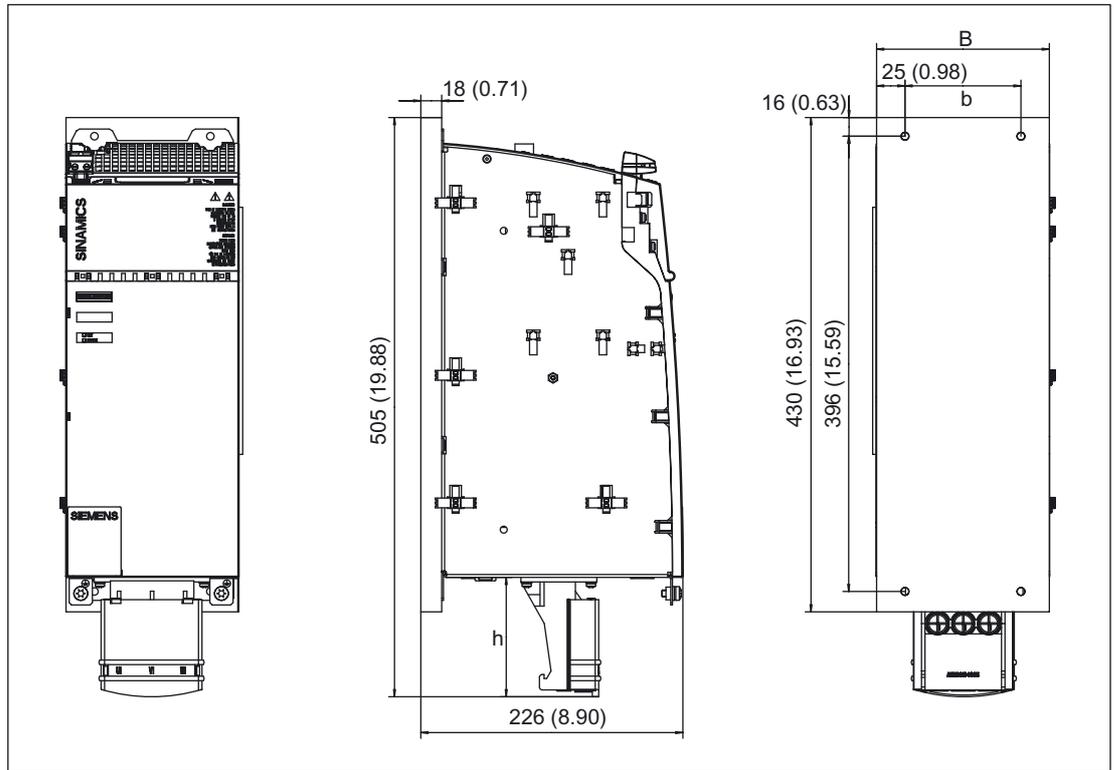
Dimension drawing of Active Line Module with cold plate (36 kW, 55 kW, 80 kW, and 120 kW), all dimensions in mm and (inches)
